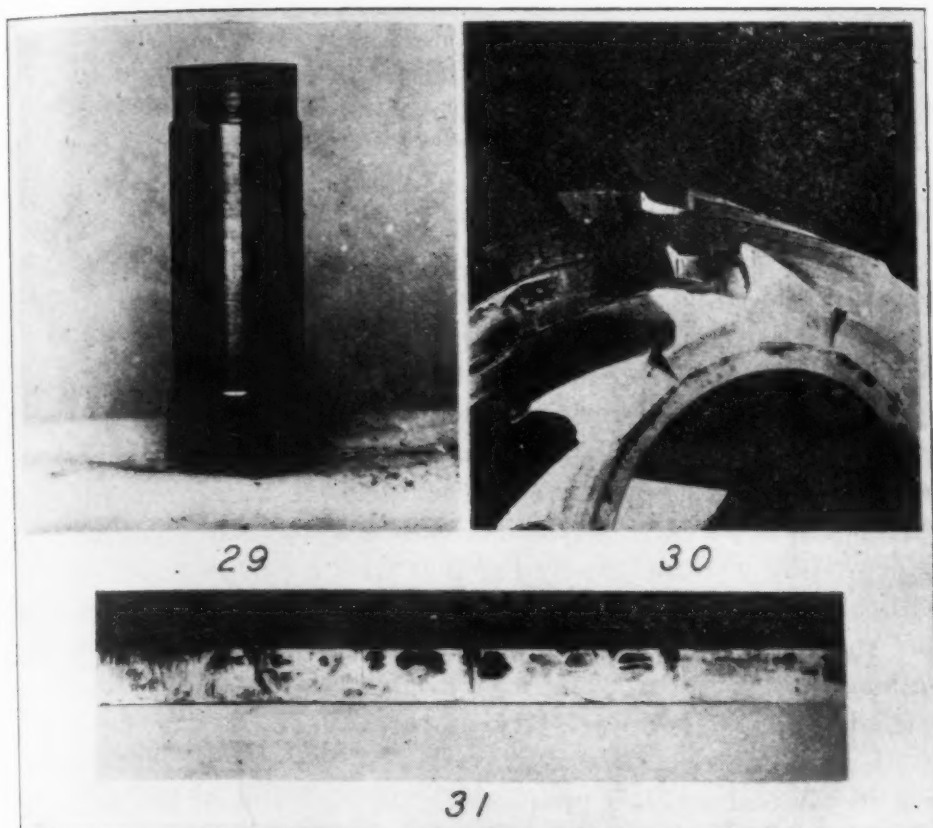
Step-down Test on Chromium-vanadium Bar Stock Showing Internal Seams. Fig. 30—High Speed Milling Cutter Showing Grinding Cracks. Fig. 31—Shear Blade of High Speed Steel Showing Cracks which were the Result of Grinding.
